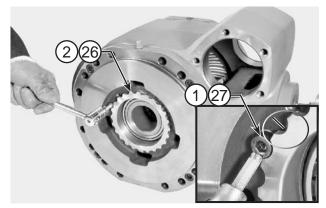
If torque and/or pinion-ring gear clearance is not within tolerance values and the ring nuts have not been removed, mark the position of the ring nuts (2, 26) and remove the safety plates (1, 27).
